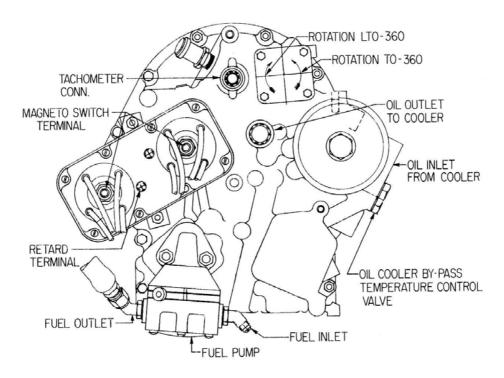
Installation Drawing – Accessory Housing – TO-360-C
